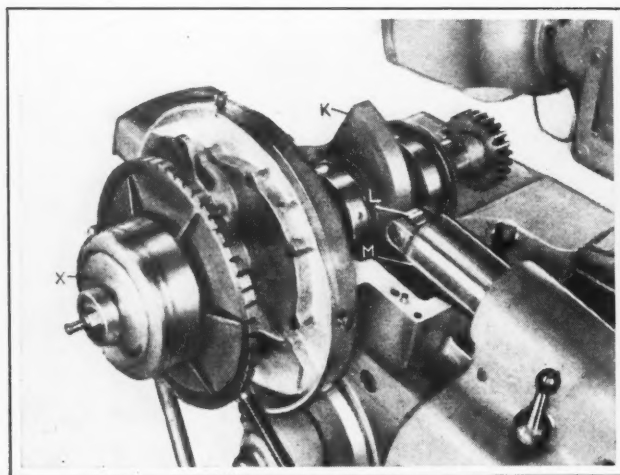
Involute Cam Arrangement employed to actuate the Work-spindle Head
